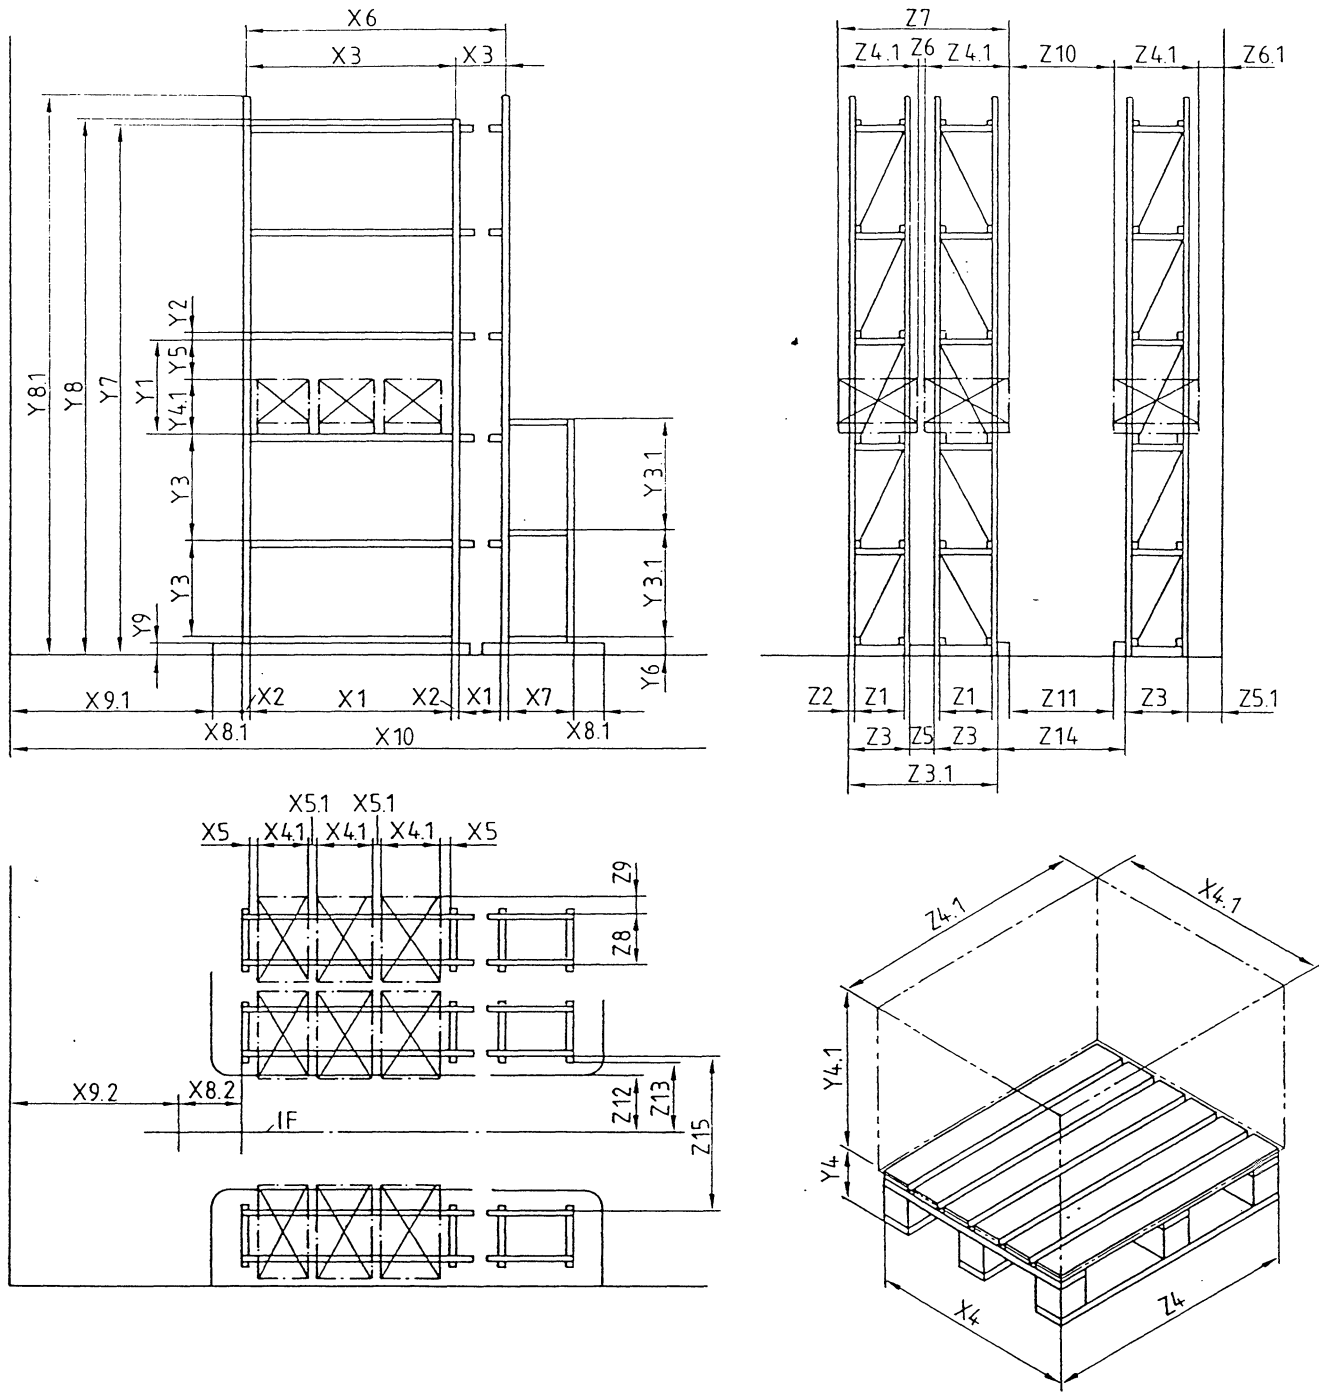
Racking, guide system, load support and load unit; warehousing system dimensions
